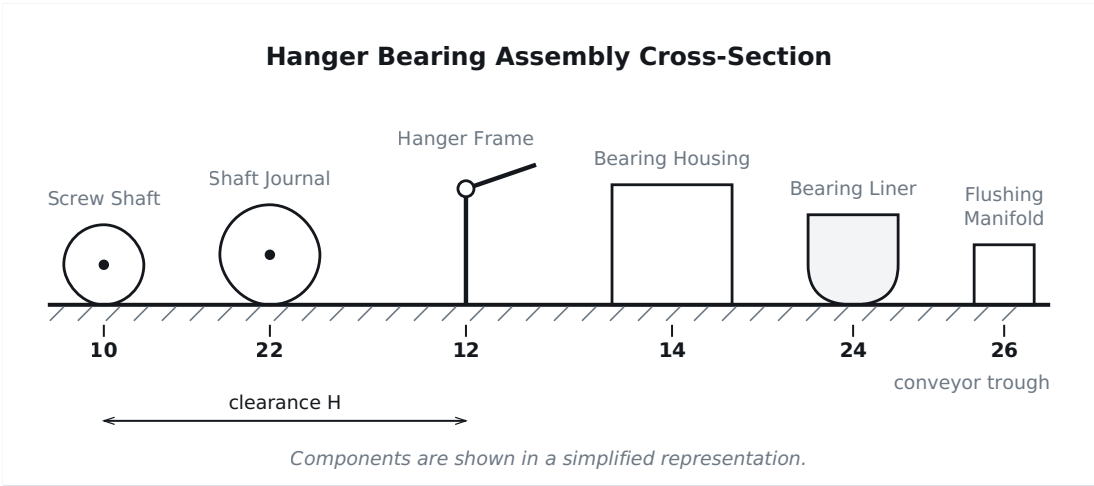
An elevation view of the hanger bearing arrangement showing key components and their relative positions. PNG
